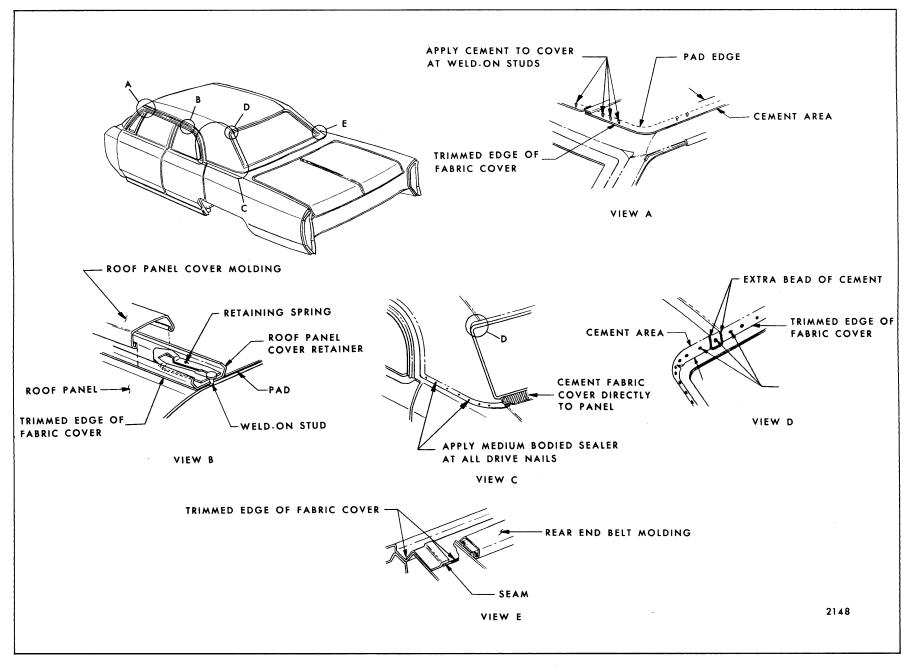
Fabric Roof Cover Installation - Styles with Roof Panel Moldings
